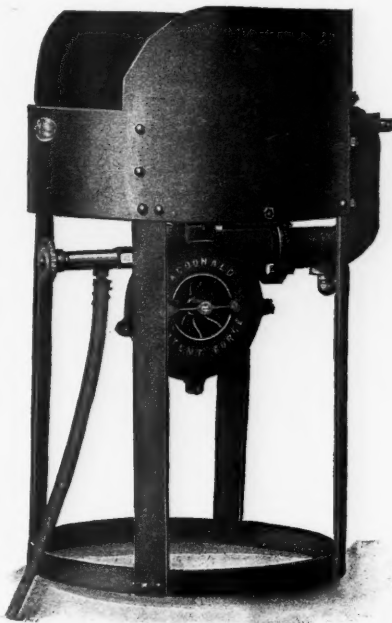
Air Forge Made by the Chicago Pneumatic Tool Company.
